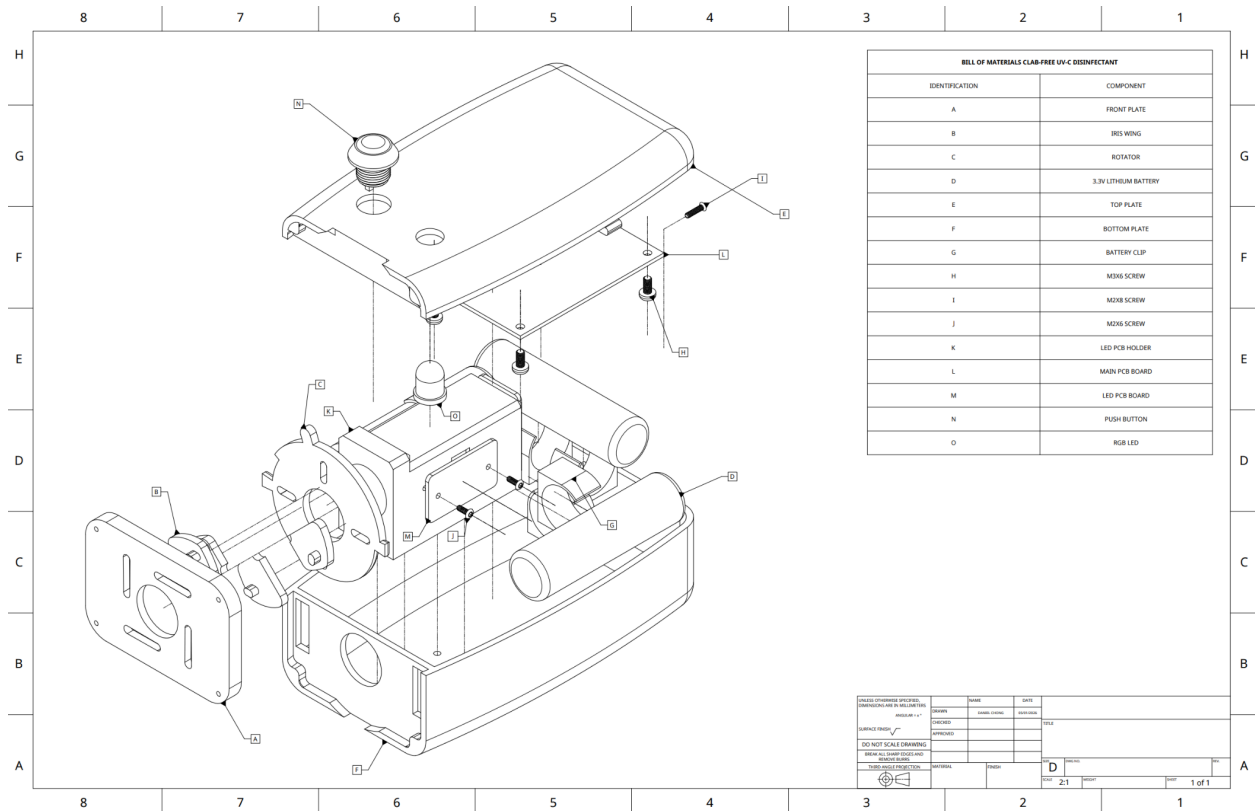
Assembly Drawing of Exploded View of CLAB-Free UV-C disinfectant
